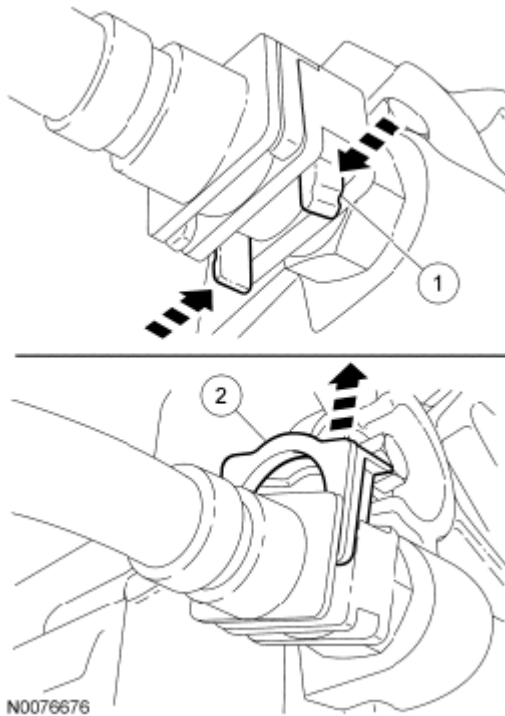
Sliding Transaxle Fluid Cooler Tube Lock Up
